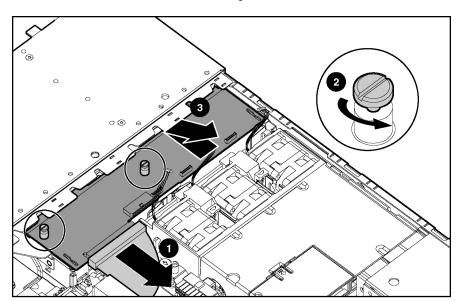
Removing the optical device/diskette drive interface board from the chassis
